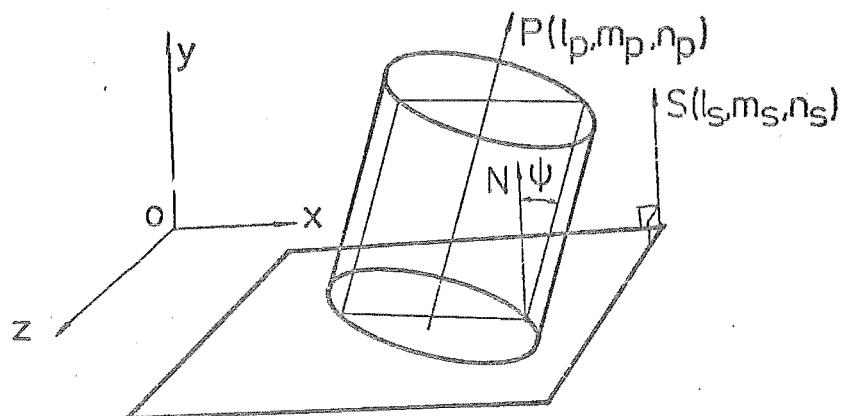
PEG EDGE/HOLE CHAMFER FACE CONTACT
